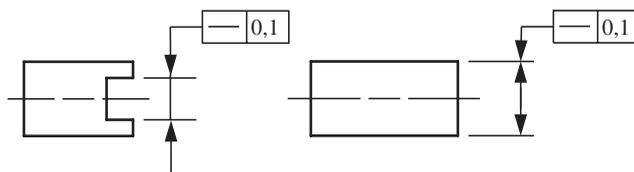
ISO Tolerance Frame Leader Line Terminating on a Dimension.
